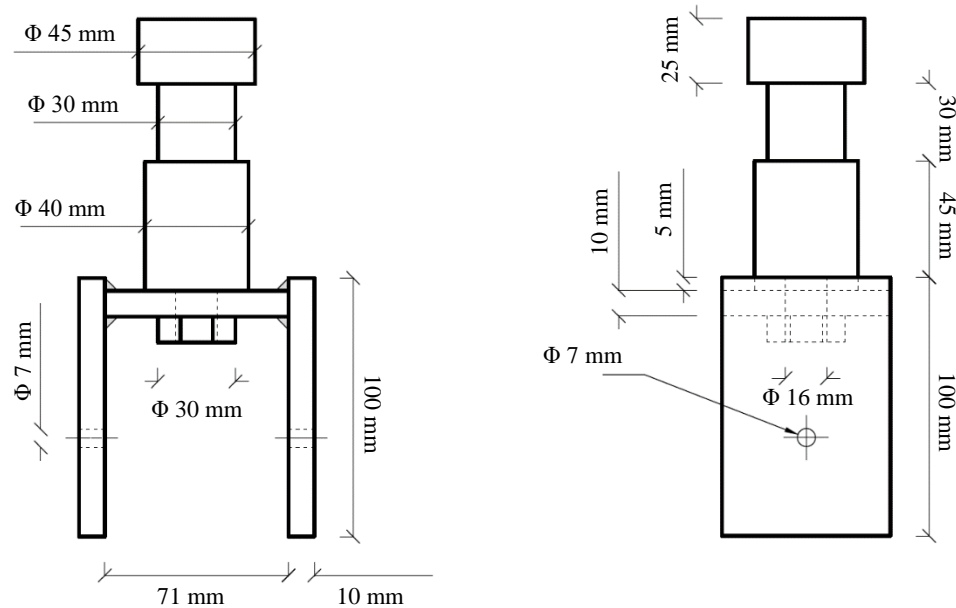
Dimensions of the clamp of double-sided pullout testing.
